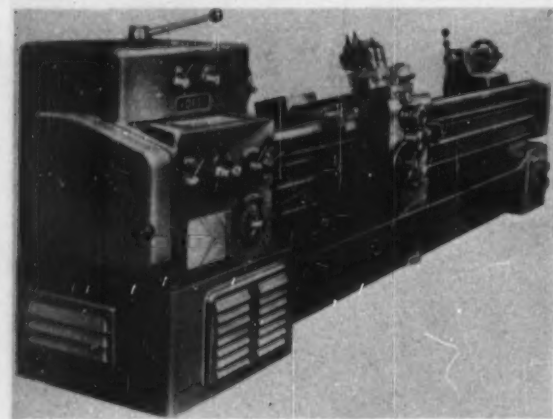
General-purpose heavy-duty lathe with inclined bed
